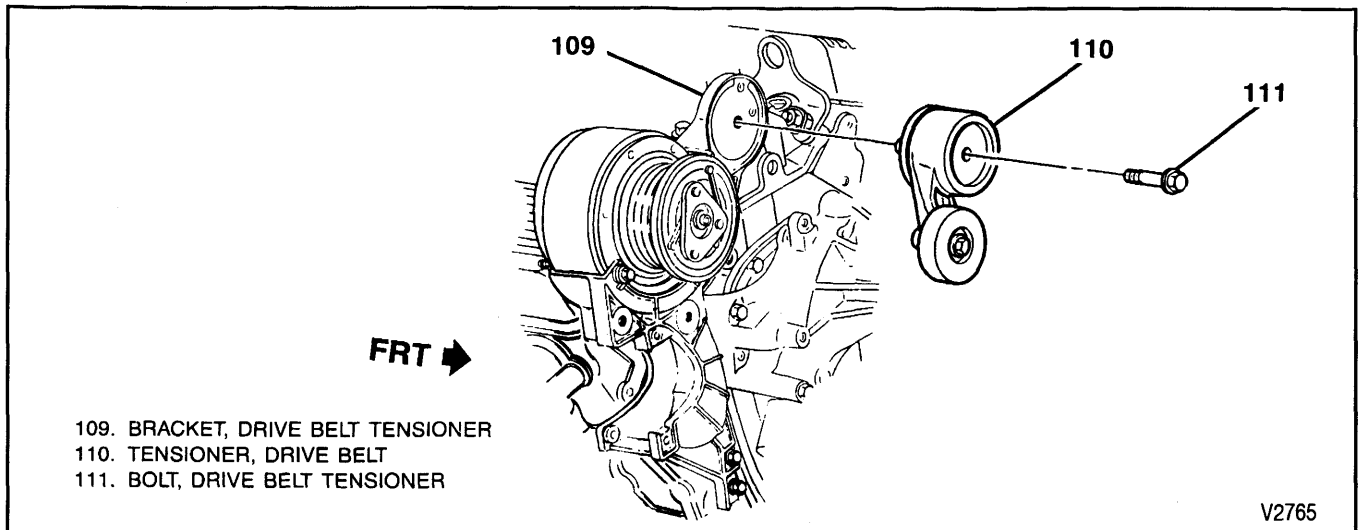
Belt Tensioner Assembly (4.3L, 5.0L, and 5.7L Engines)
